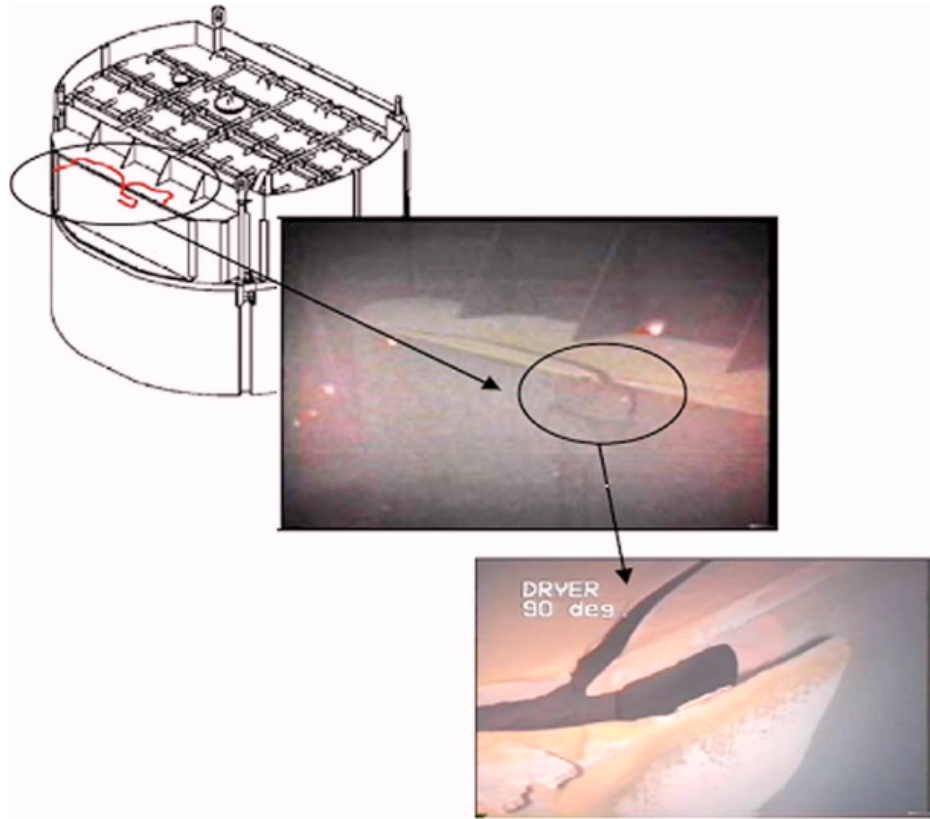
Steam dryer assembly of quad cities unit 2 (top left) and details of the acoustic fatigue failure on the outer hood [102].
